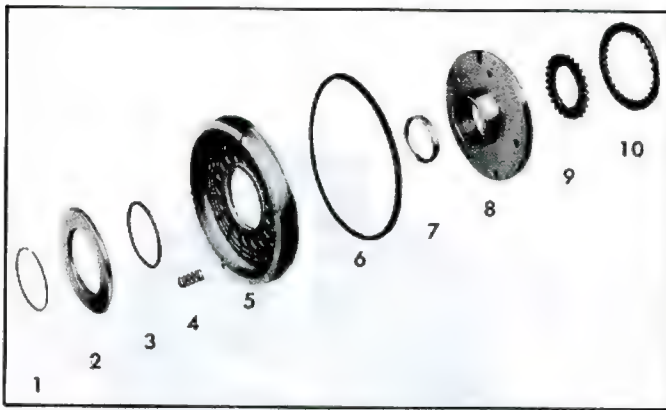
E-40—Rear Pump and Reverse Piston—Exploded View
